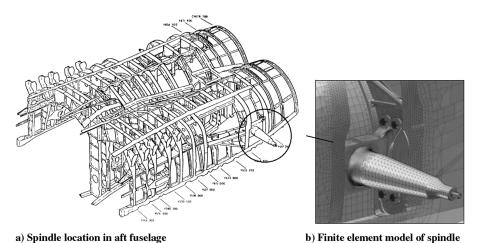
F/A-18 aft fuselage horizontal stabilator spindle [24].
